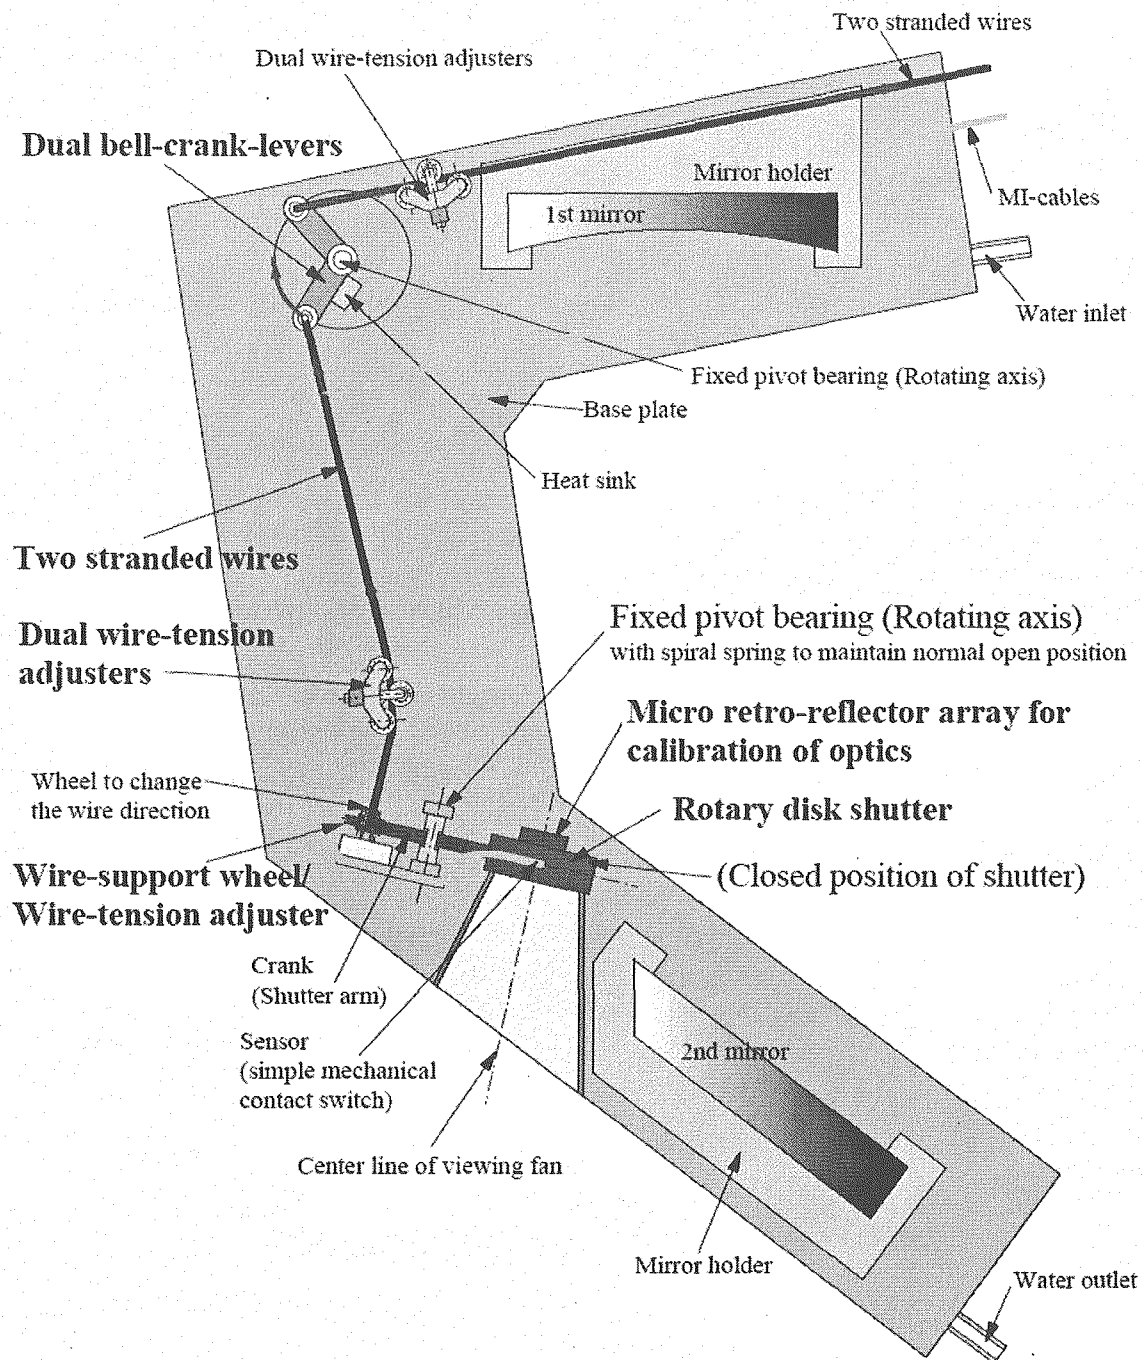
(a) Main parts of the rotary disk type shutter mechanism installed in the upper port plug. Stranded wires, dual wire-tension adjusters, dual bell-crank-levers, wire-support wheel/wire-tension adjuster etc. are used as the driving mechanism.
